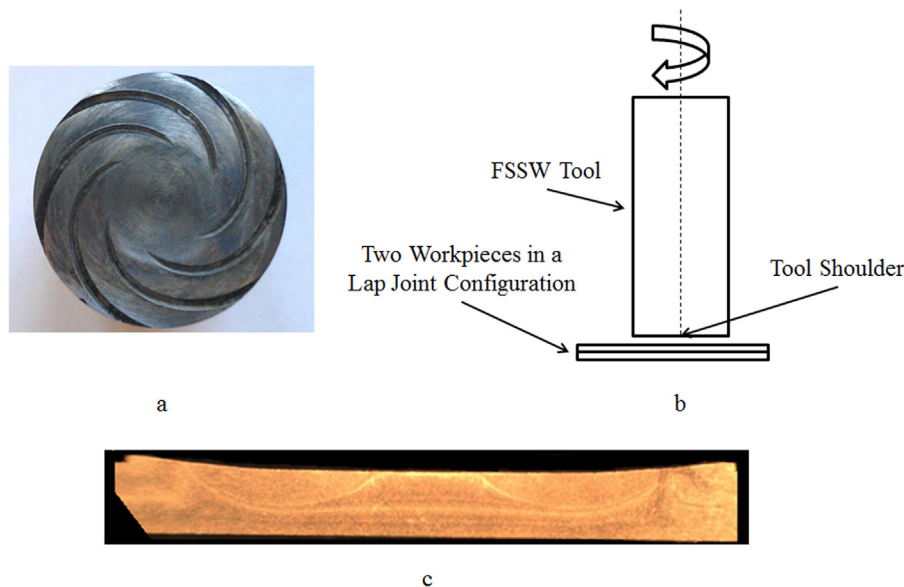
(a) Pinless FSSW tool with a spherically tapered shoulder. (b) Diagram of the FSSW tool and workpiece orientation. (c) A macrosection of an FSSW spot weld made with good quality.
